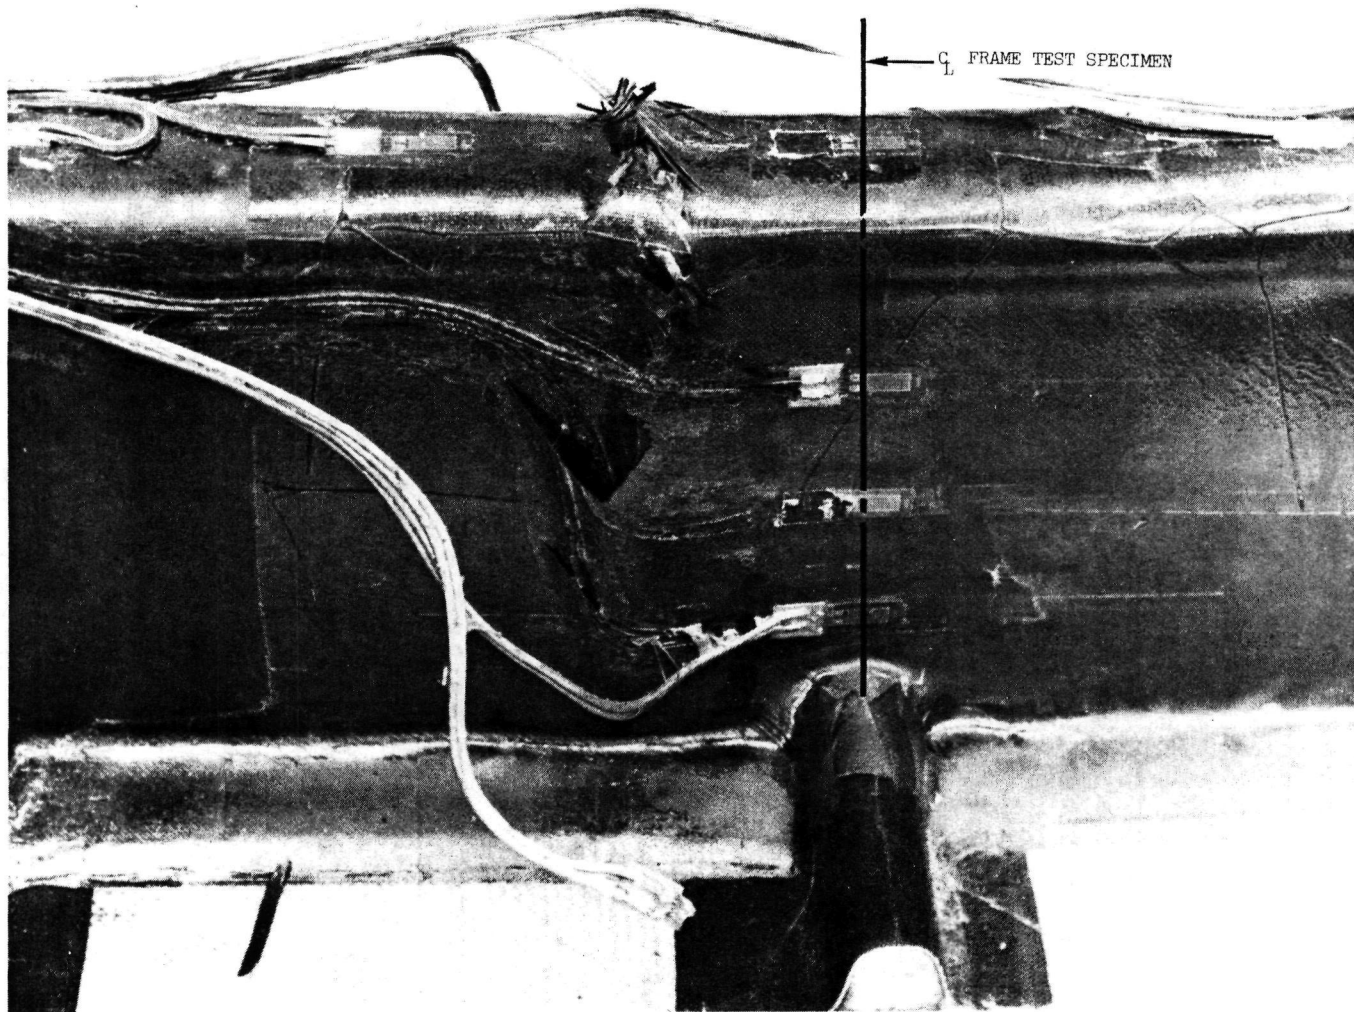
TEST #2, FRAME S/N 4; VIEW OF STATICALLY INDUCED FRACTURE,
